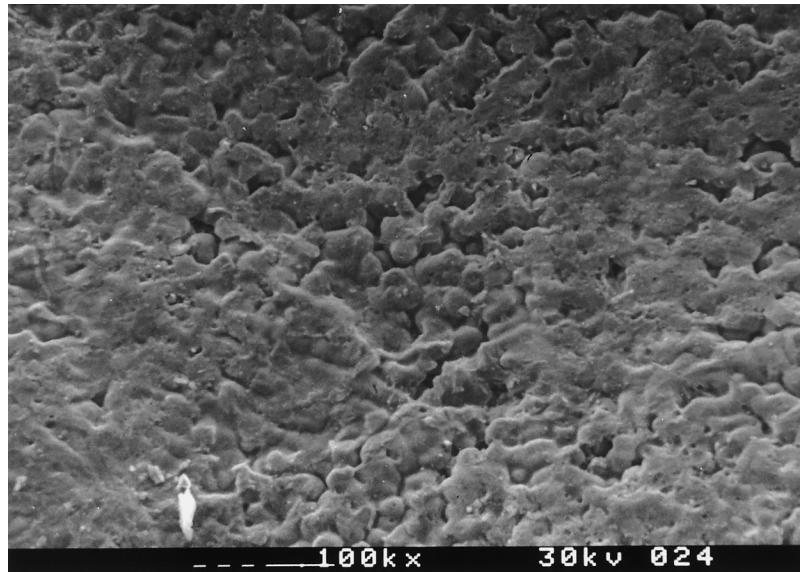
Fracture surface of failed C47 landing gear strut.
